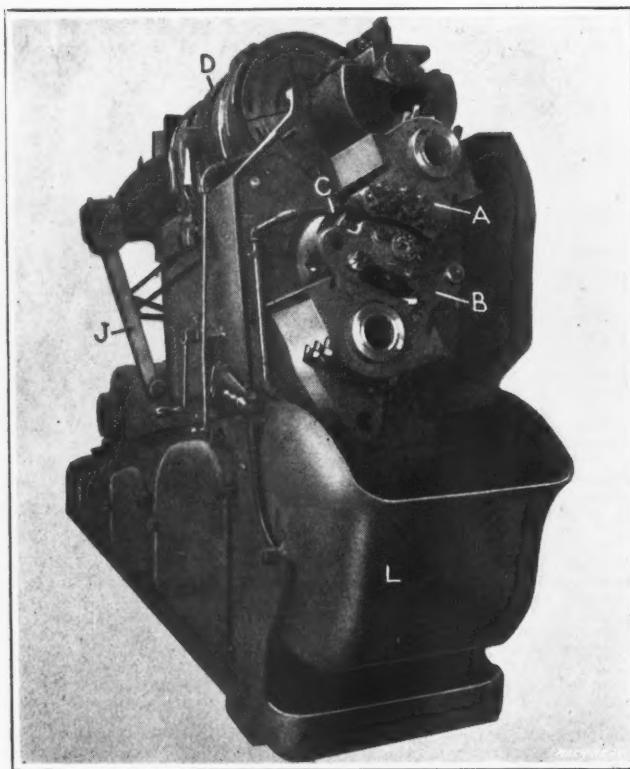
End View of Automatic Lathe showing Arrangement of Both Tool-heads
